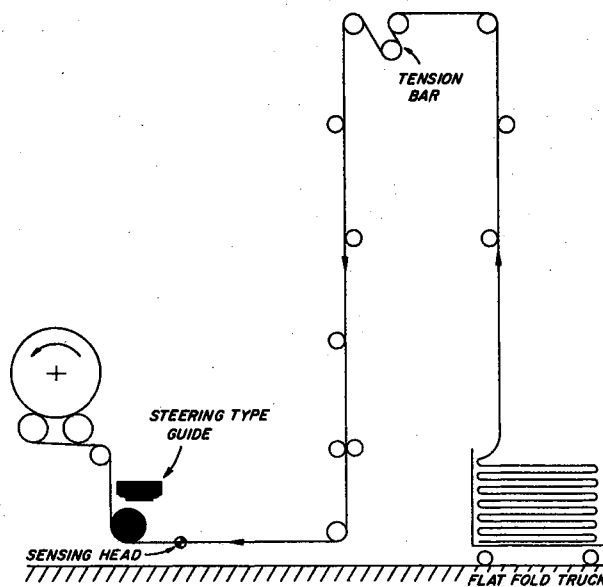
Textile Rewind Machine With Steering Guide.
